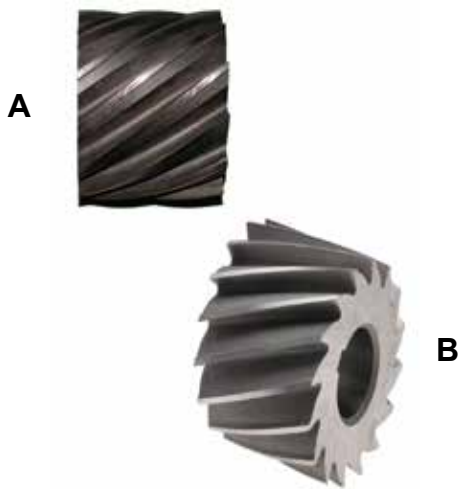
(A) A helical or spiral mill, with teeth arranged in a deep spiral around the body.
